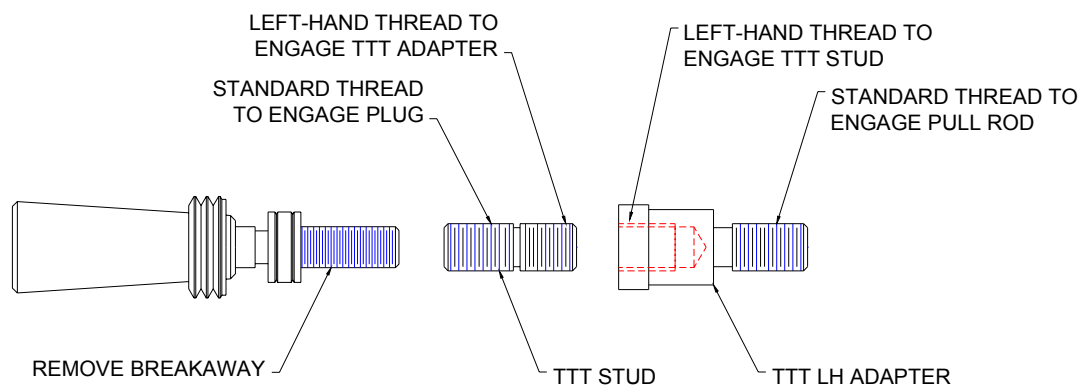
Through-The-Tube Adapter Kit and CPI / Perma Plug
